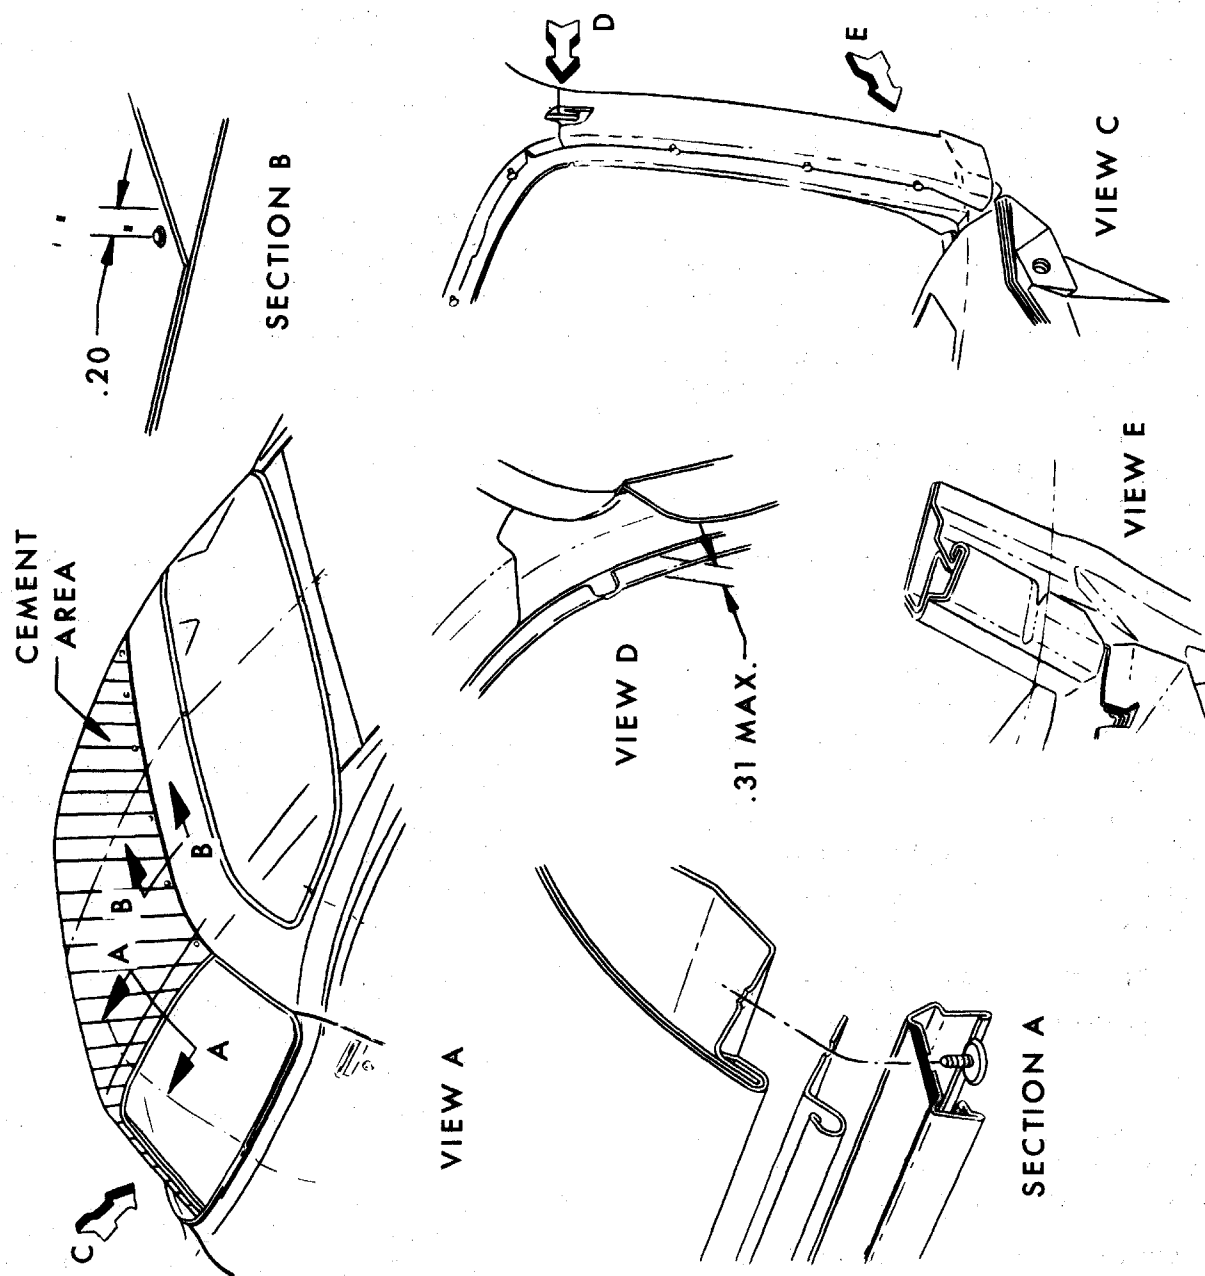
Typical Fabric Roof Cover Installation - "F" Styles - CB7 Option
